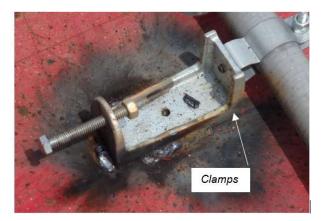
Clamps used to fix the tubes with cables of accelerometers inside them were welded to railcar.
